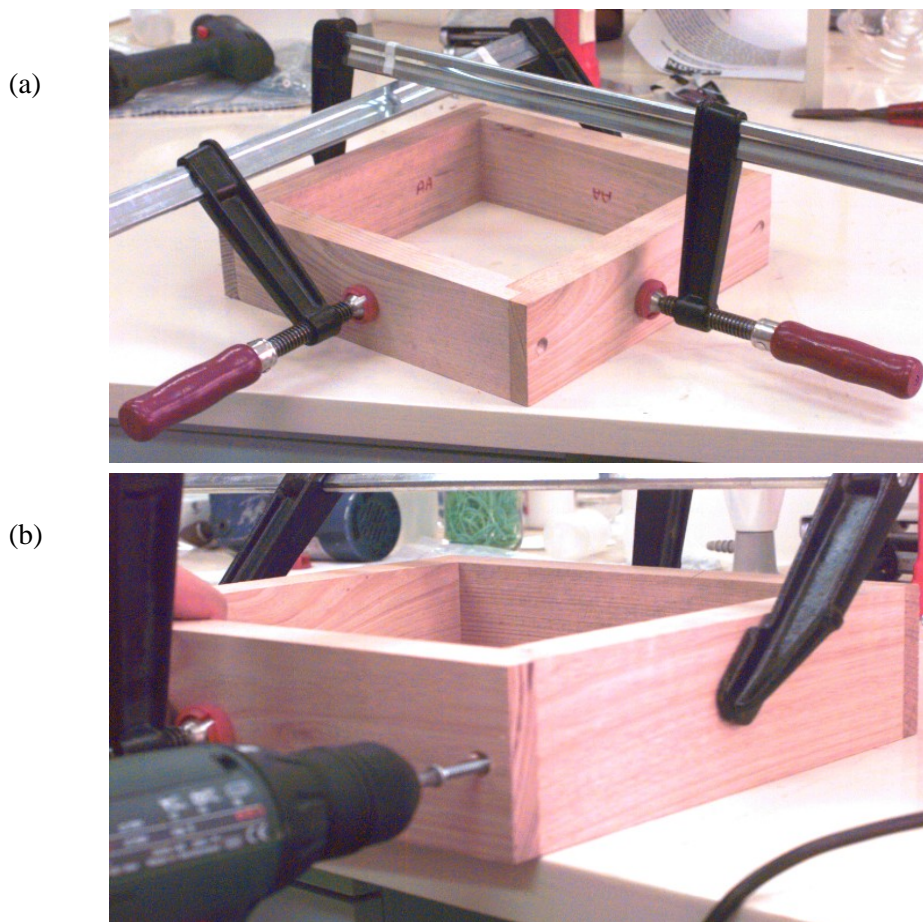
Arranged components of a model window frame being clamped (a) and a single screw being driven into the overlapping rebate to fix the butt joint (b).
